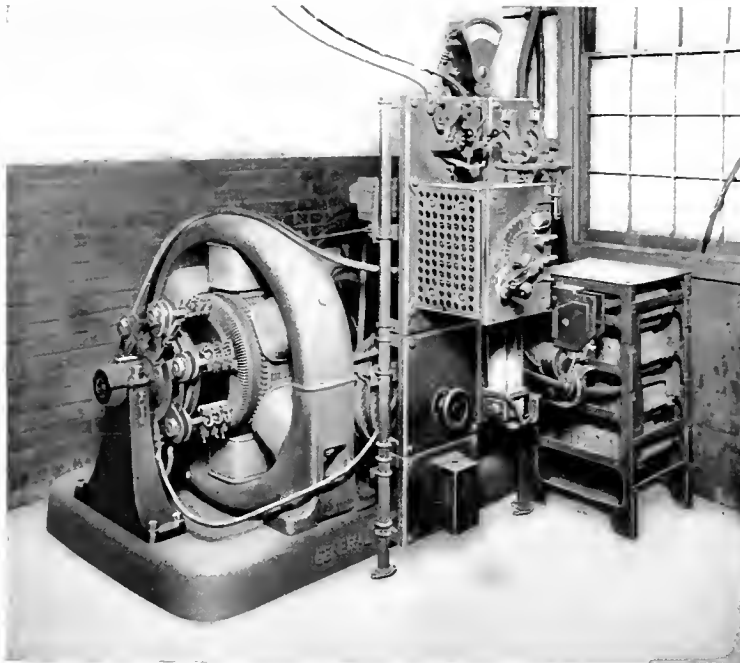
500 Ampere Arc Welding Installation
